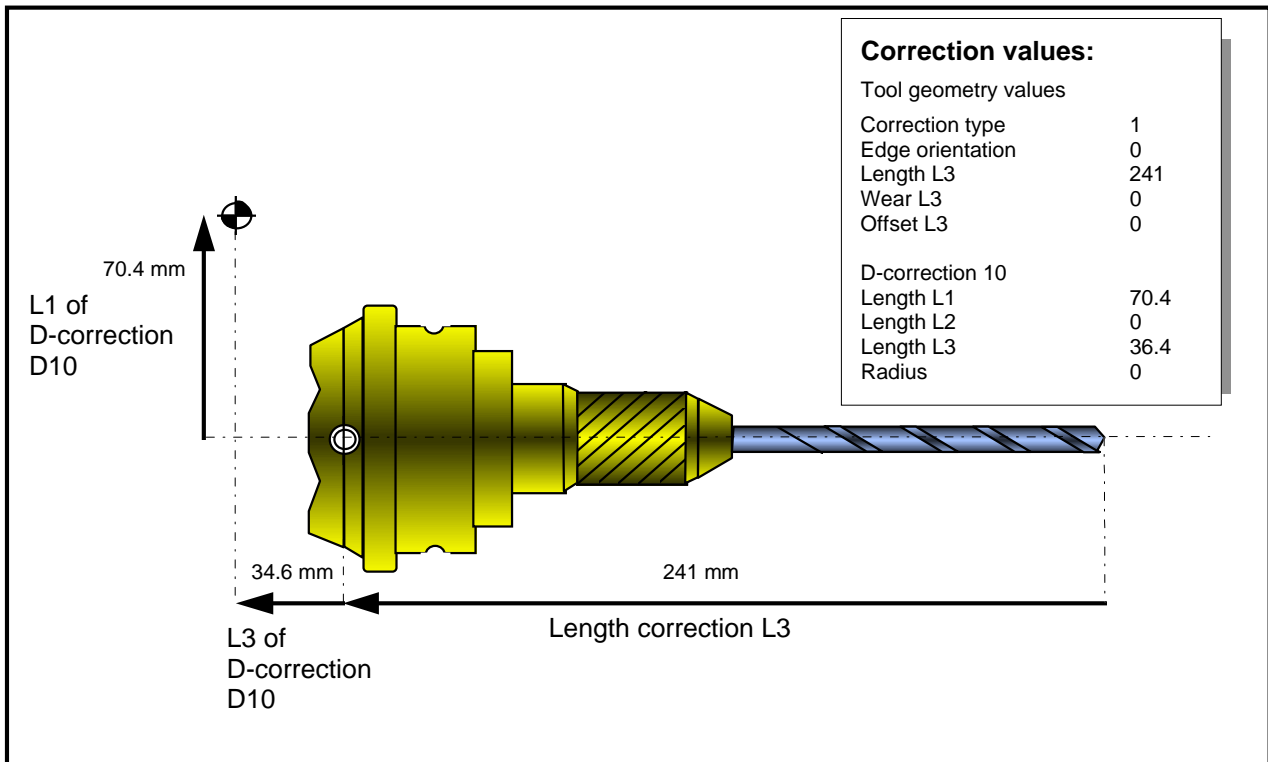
Definition of the tool reference point with the aid of D-corrections
